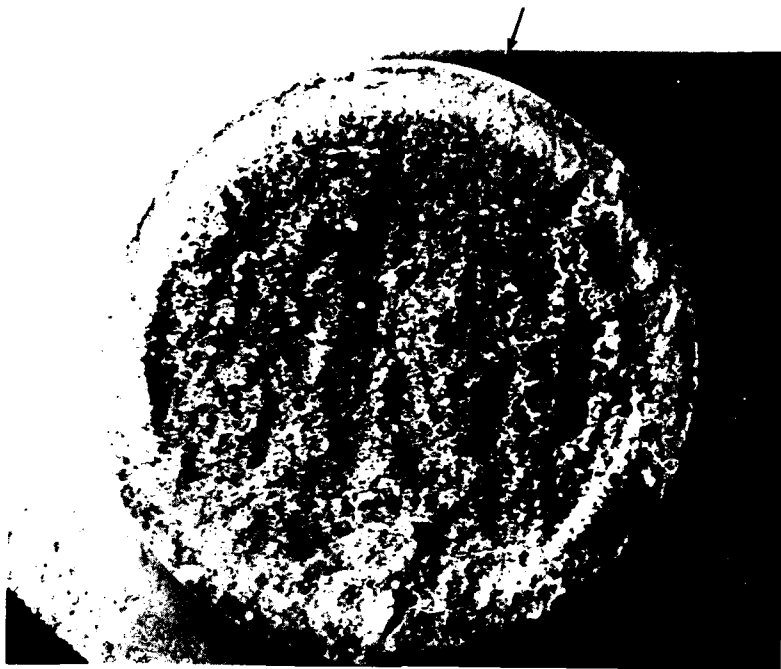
This SEM macrograph of the fracture surface from the June failure shows the fracture origin (see arrow). Depth of the core hardening can be inferred to be 0.020 in. to 0.025 in. from the fracture appearance. (16X).
